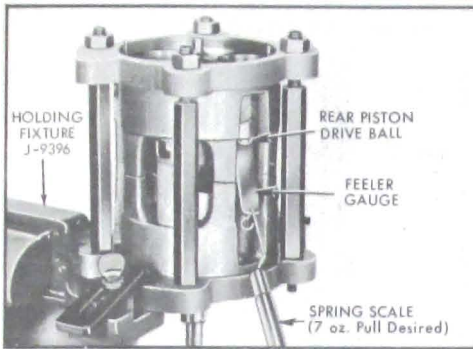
Checking Selected Feeler Gauge with Spring Scale
